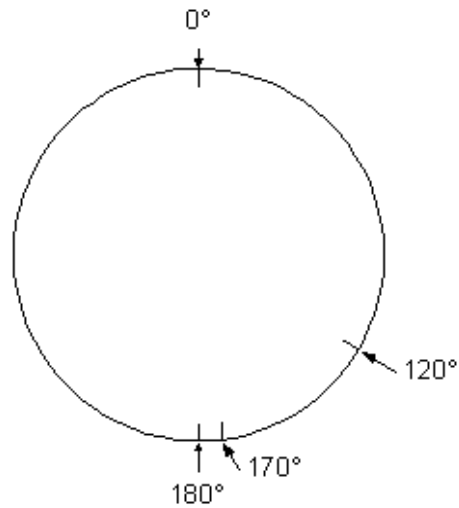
OD Thread with Chase in (A) and Chase out (C) Example
